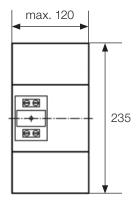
Ring core current transformer (two cables per phase, up to plug size 2)
